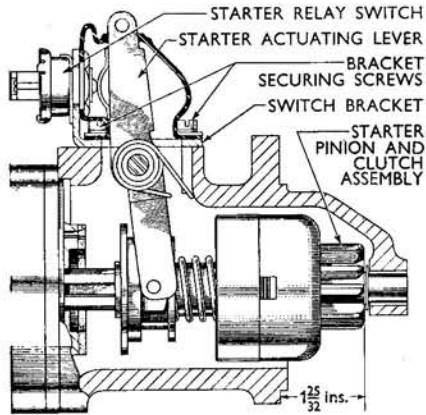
Adjust starter actuating mechanism so that front face of pinion is advanced to 1 25/32 inches from starter mounting flange when electrical contact is made. Refer to text.
